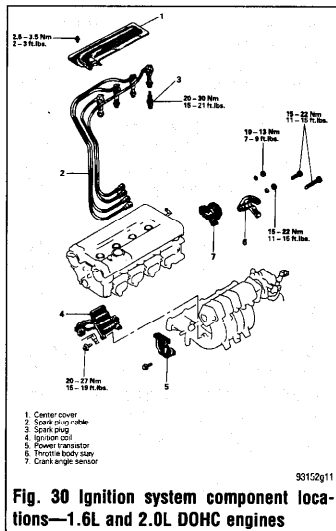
Ignition system component locations—1.6L and 2.0L DOHC engines
